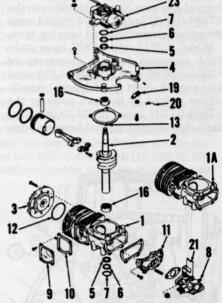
Exploded view typical of AV520 and AV600 engines. The cylinder and crankcase for some AV520 and all AV600 models is shown at (1A).
